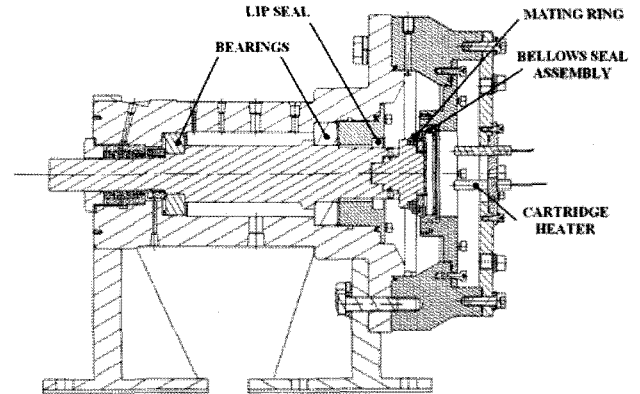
Cross-sectional view of mechanical face seal test rig.
